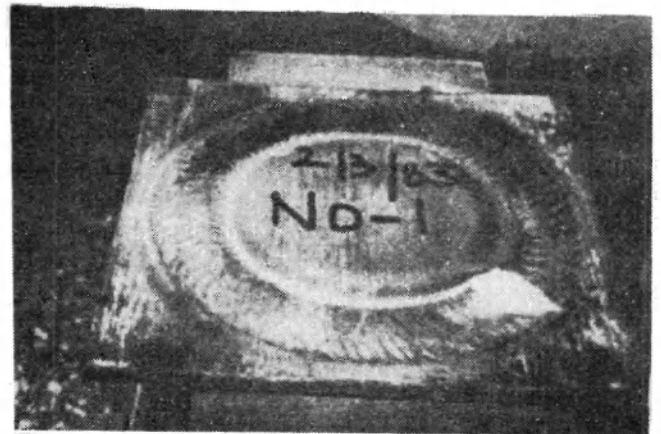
En 9 plate plasma arc weld surfaced
